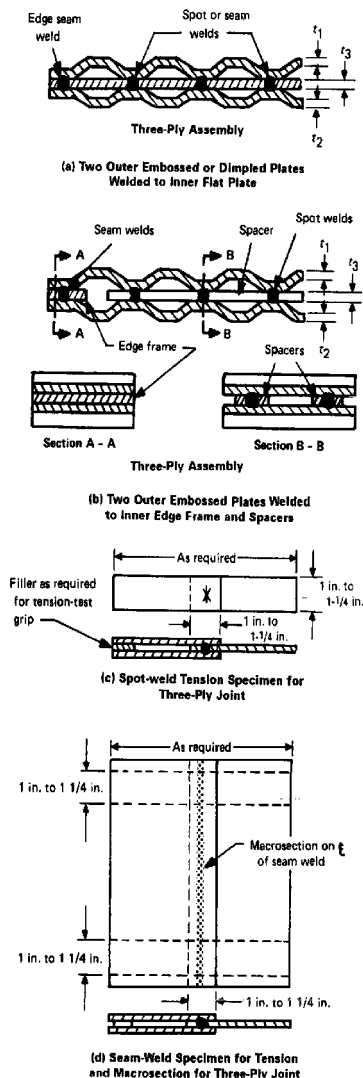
THREE-PLY JOINT ASSEMBLIES
